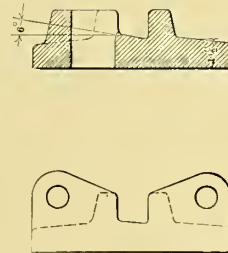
SECTIONAL VIEW AND FLANGE OF BASE PLATE.
